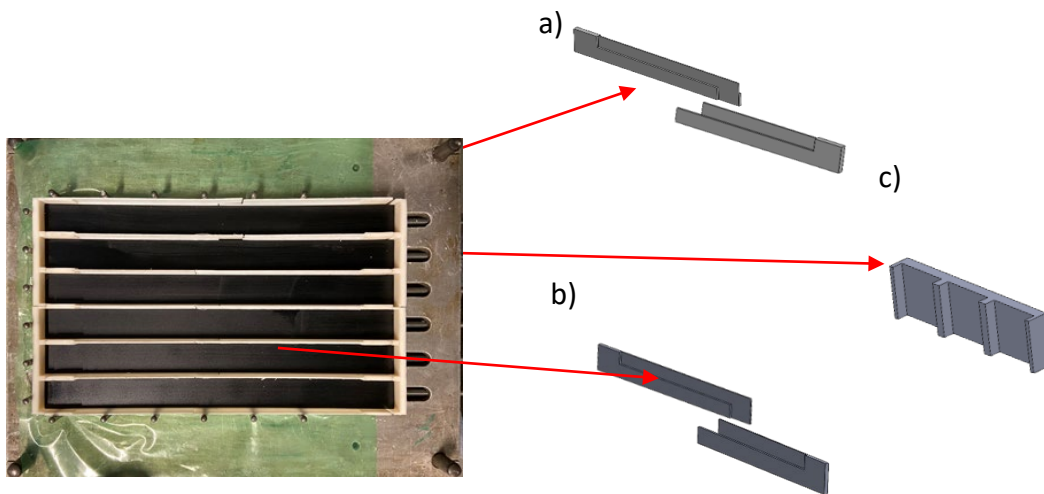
Mould assembly with 3D printed Polycarbonate specimens that are the white parts shown in the mould. a) middle, b) lateral and c) end lock.
